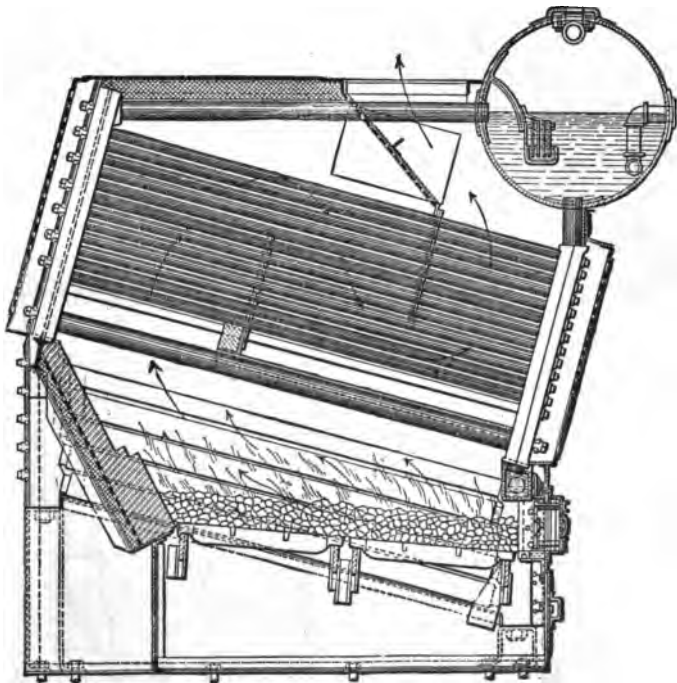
One of the many Types of Coal Burning Watertube Boilers.
